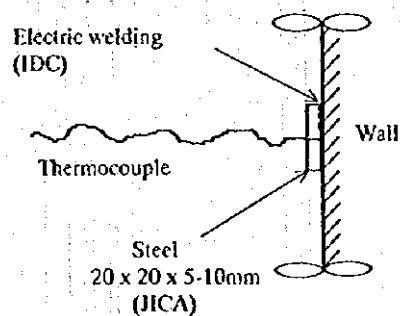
Welding Thermocouples to the Furnace Shell and Bottom
